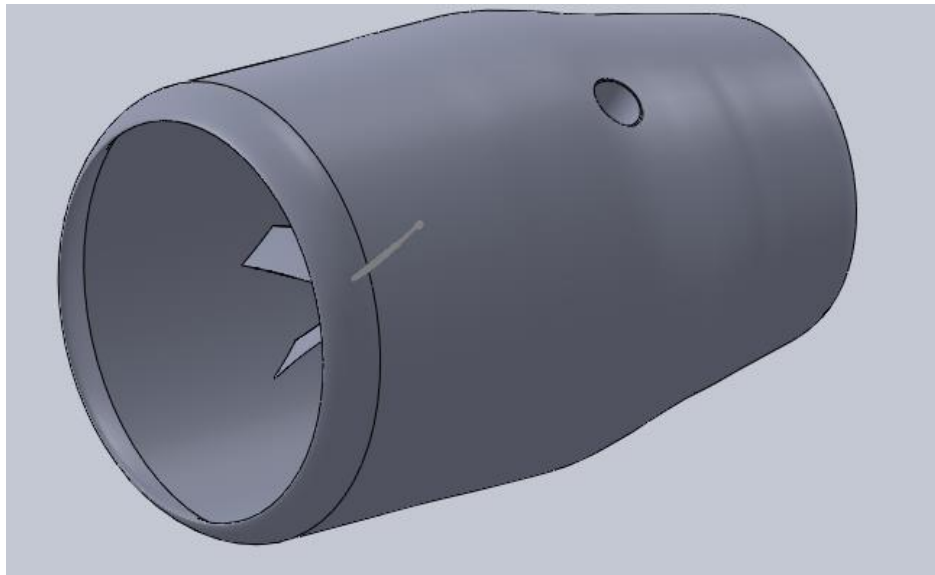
Isometric View of Turboman Engine Assembly showing Exhaust Holes
